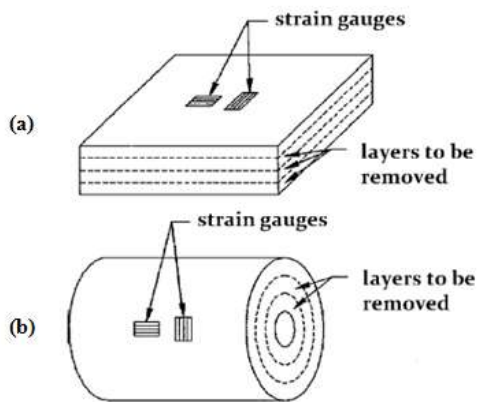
Layer removal method, (a) flat plate, (b) cylinder [21].
